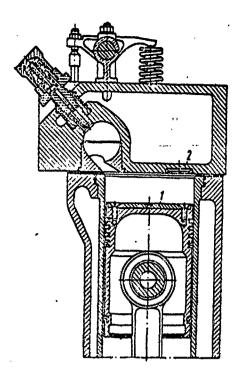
Sectional drawing of scaler installation on piston head (1) and cylinder head (2) of 10h-10.5/13 engine.
